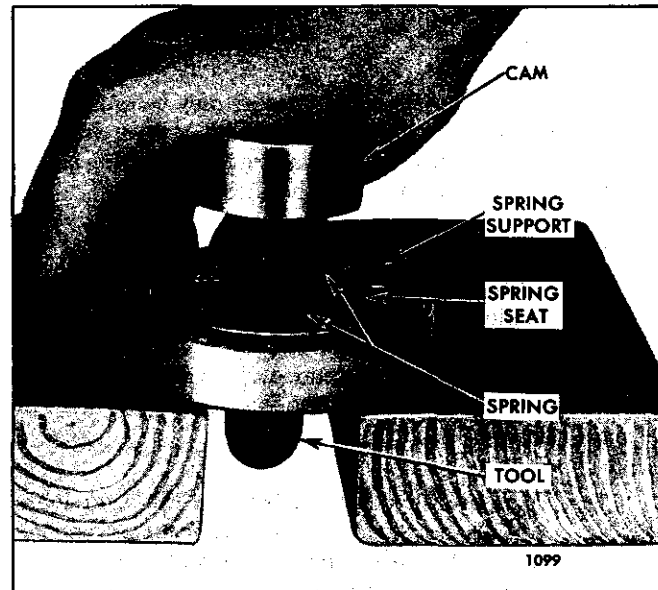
Inserting Cam in Blower Drive Support with Tool J 5209
